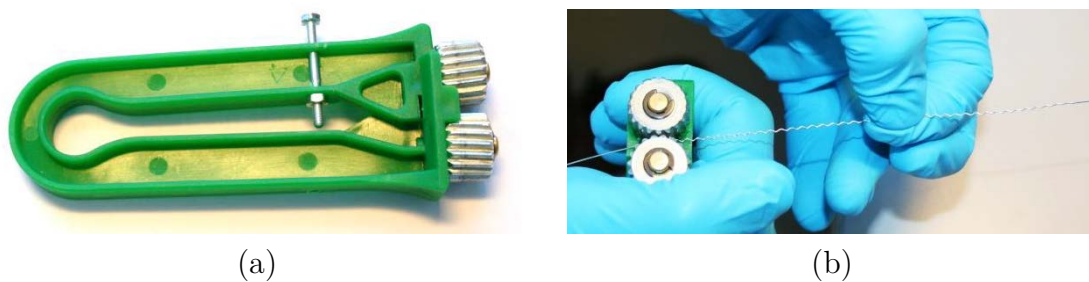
(a) Hand-tool to manufacture first wave-shaped wires and (b) photograph of the manual reshaping process, as well as the resulting wire.
